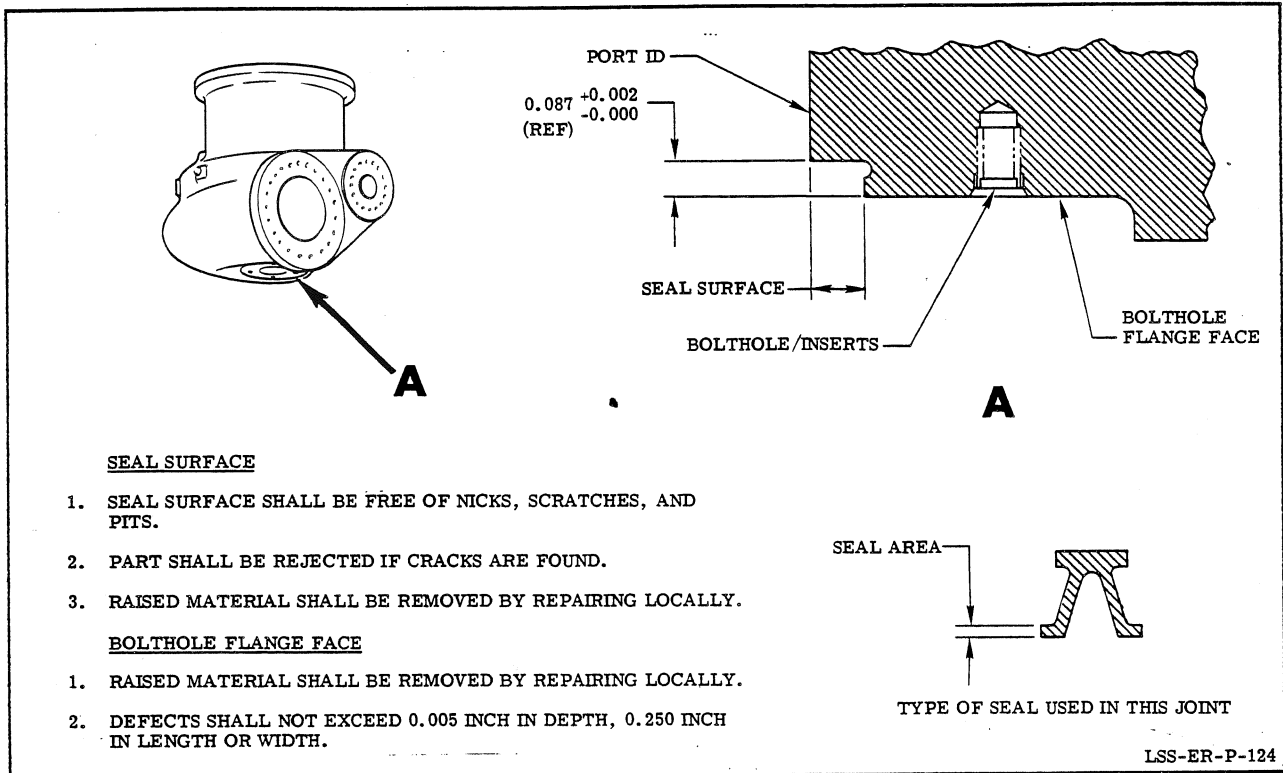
LPOTP Housing RS007802 Speed Transducer Port Seal Surface Inspection Guide (Joint 01.1)
